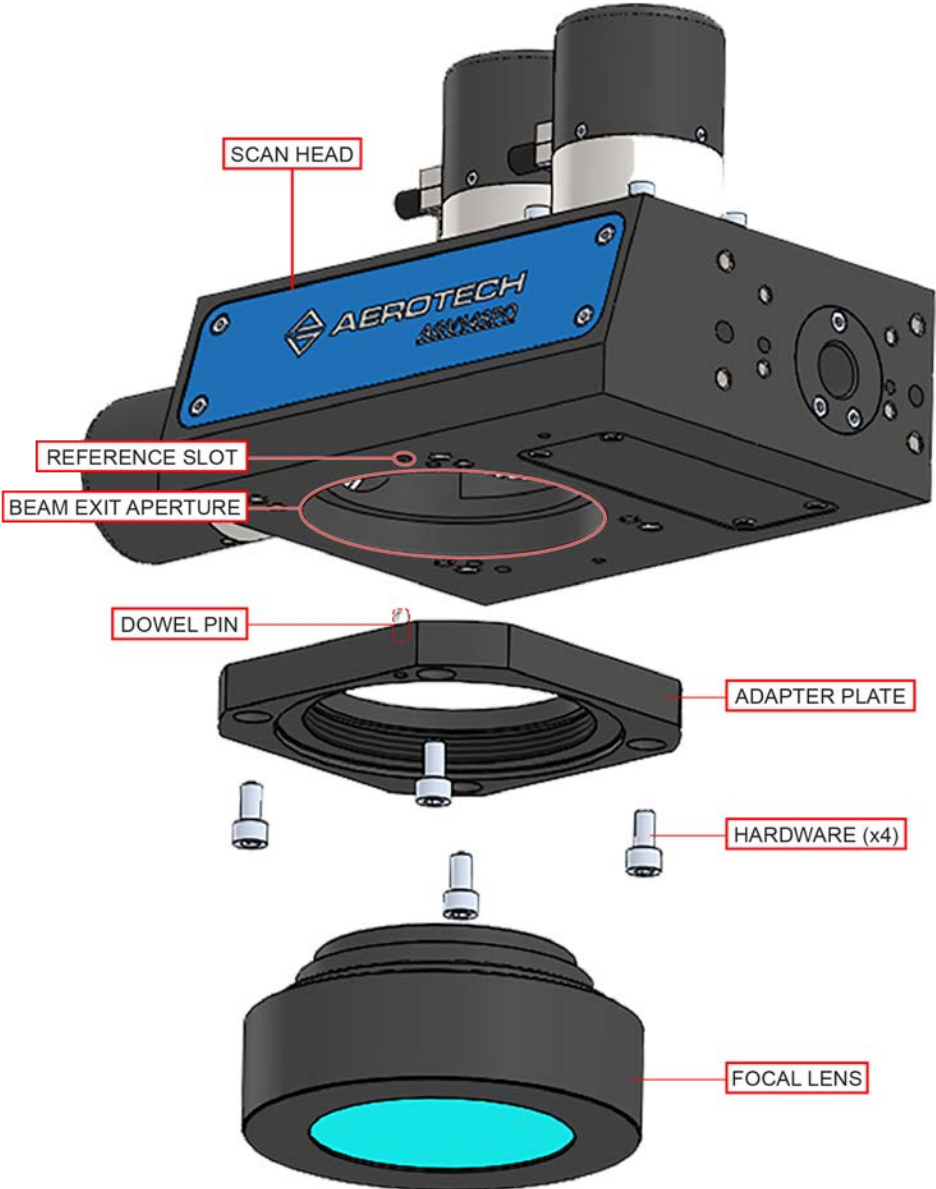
Assembly of Focal Lens to Scan Head (AGV-SPO)
